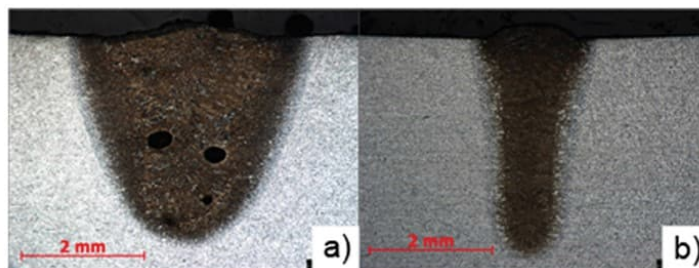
Porosity (left) in laser weld and free of porosity weld (right) (Suder et al., 2012).
